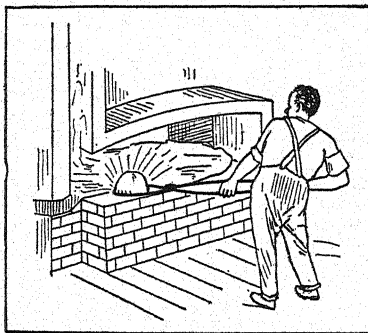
Early hand-puddling furnace. (*Courtesy of Reading Iron Company.*)
